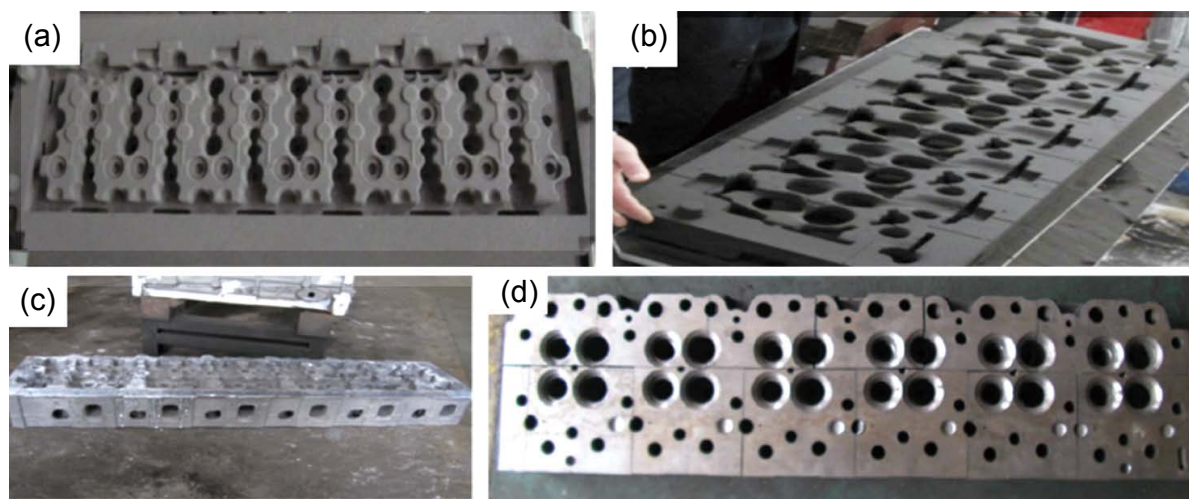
SLS-based sand mold and casting: (a, b) sand mold; (c, d) casting of cylinder head of six-cylinder diesel engine [44]
